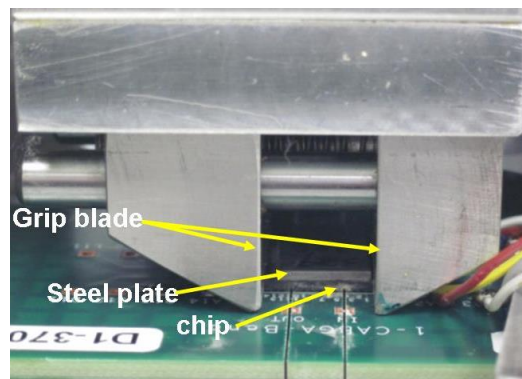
Picture of shear tester head assembly that is designed to grip and move the chip in a horizontal direction, parallel to PCB, without backlash.
